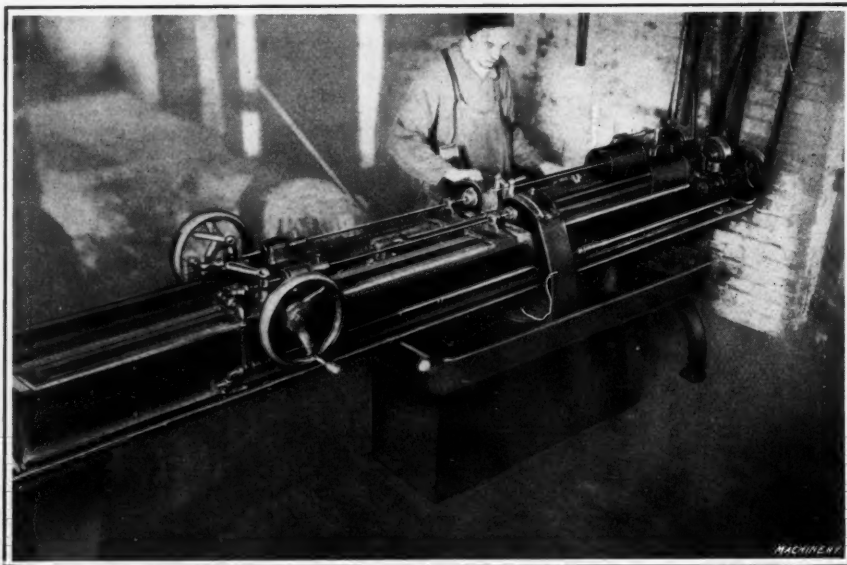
Pratt & Whitney Gun Barrel Drilling Machine
